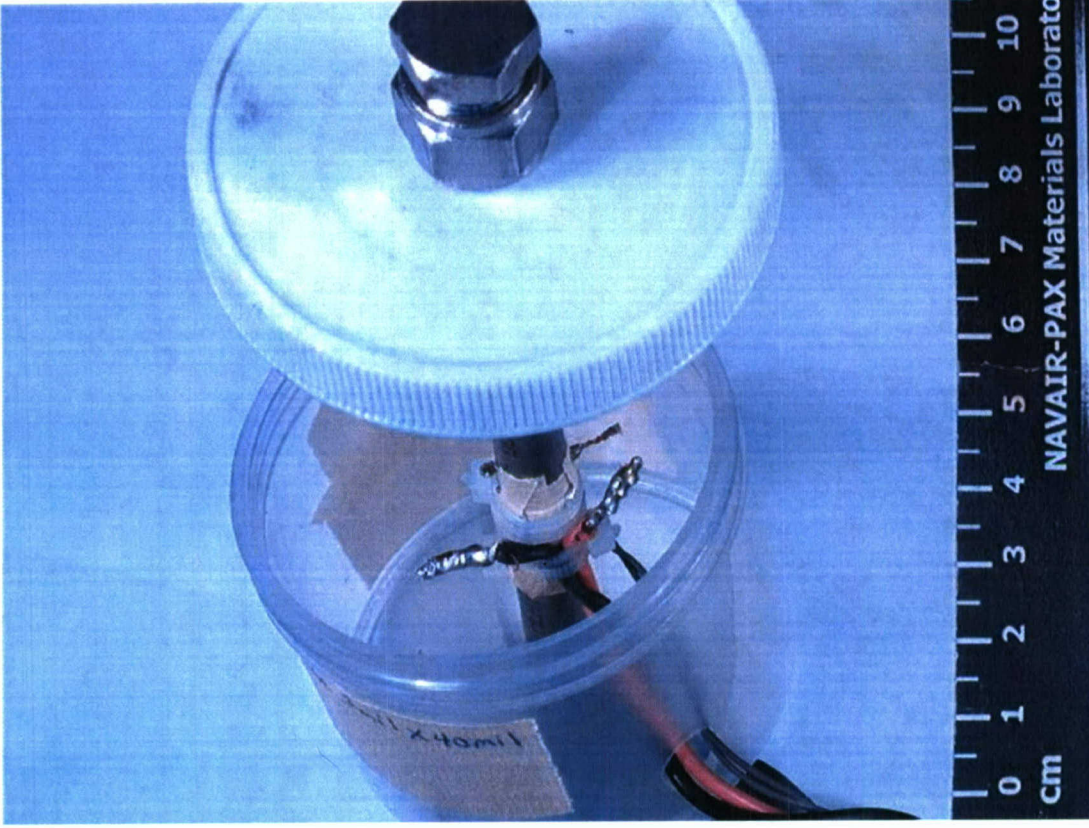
Hydraulic Impulse Fatigue Test Specimen
